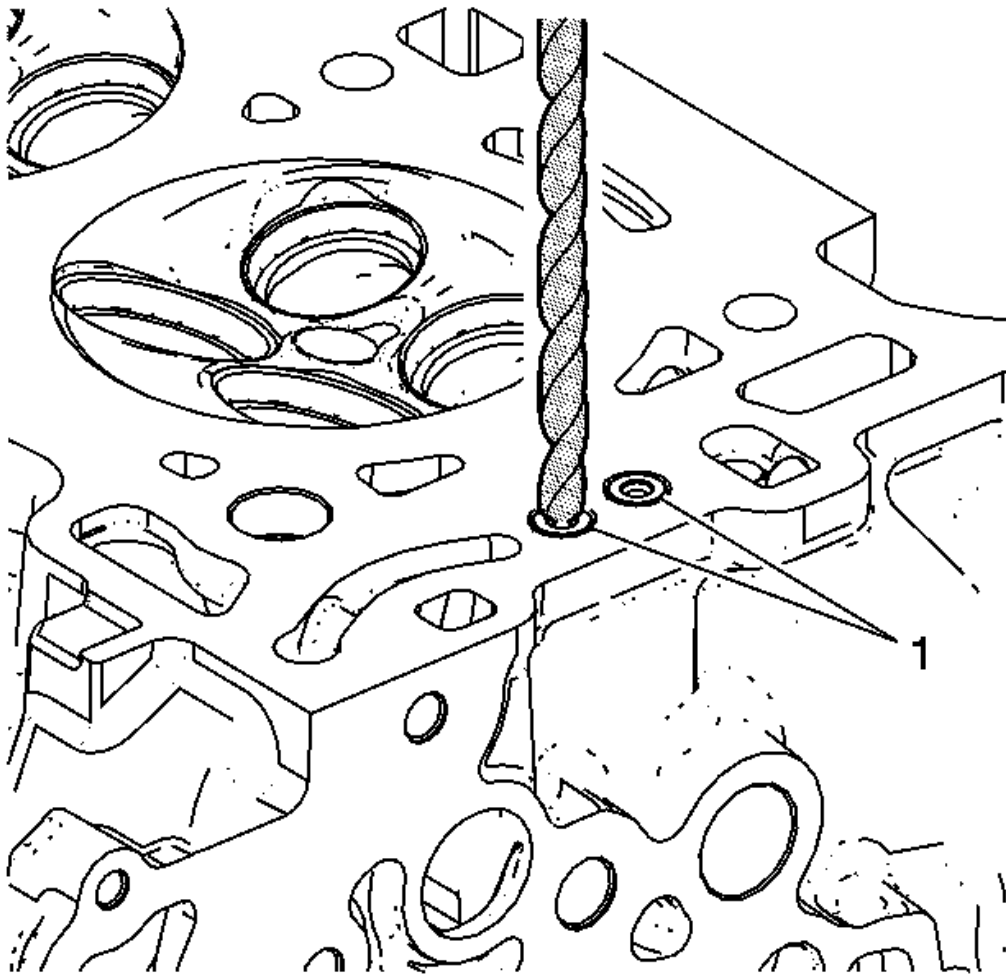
Locating Cylinder Head Coolant Threaded Plugs
